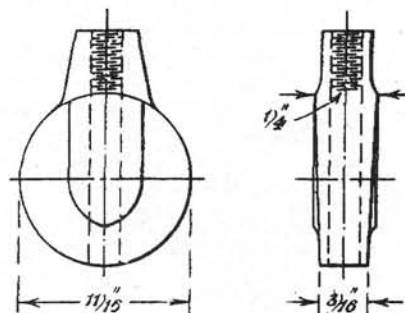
Wedge Disc for 9-16th-in. Sluice Valve.
